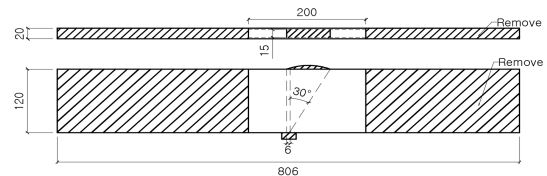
Weld zone hardness and macroscopic piece
